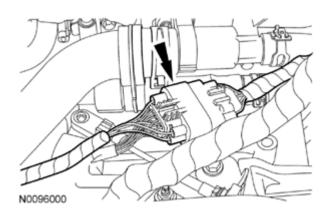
Locating Engine Wiring Harness Electrical Connector
